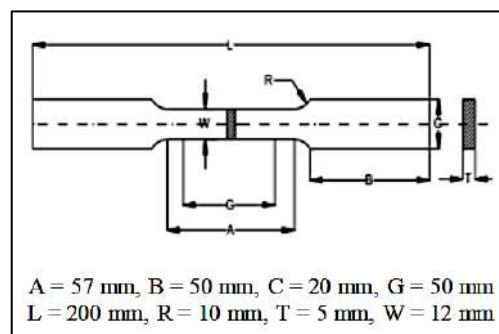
The plate shape and dimensions of the tensile test specimen [17]
